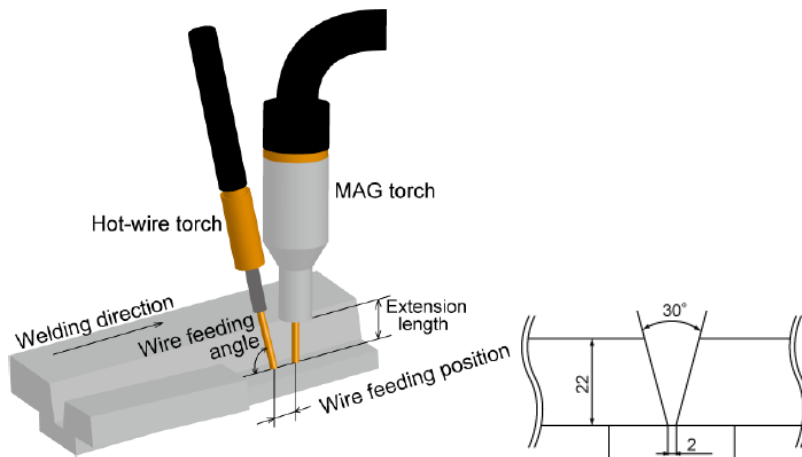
Schematic illustration of hot-wire MAG welding method [34].
